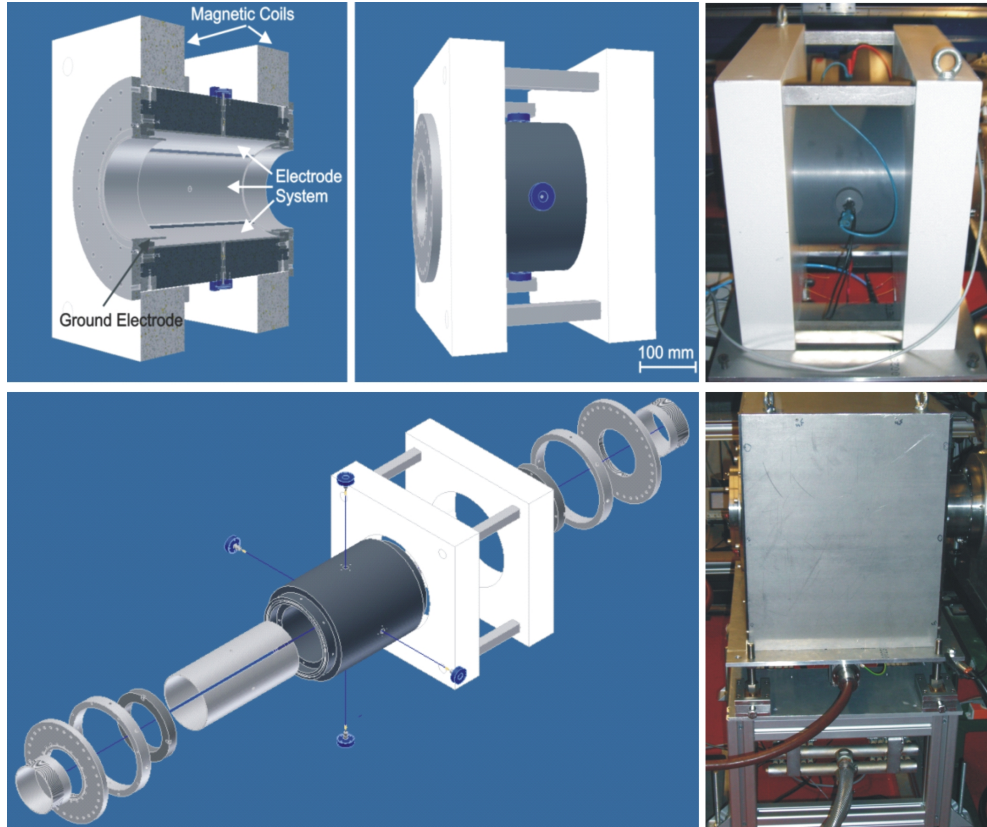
Technical drawing and pictures of the prototype Gabor lens for GSI.
